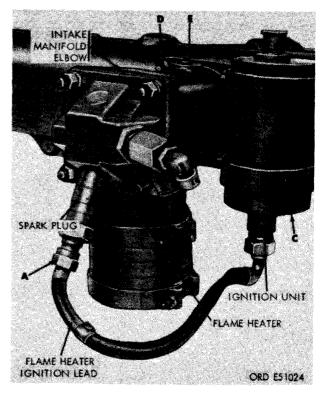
REMOVING OR INSTALLING INTAKE MANIFOLD ELBOW WITH FLAME HEATER INSTALLED.
